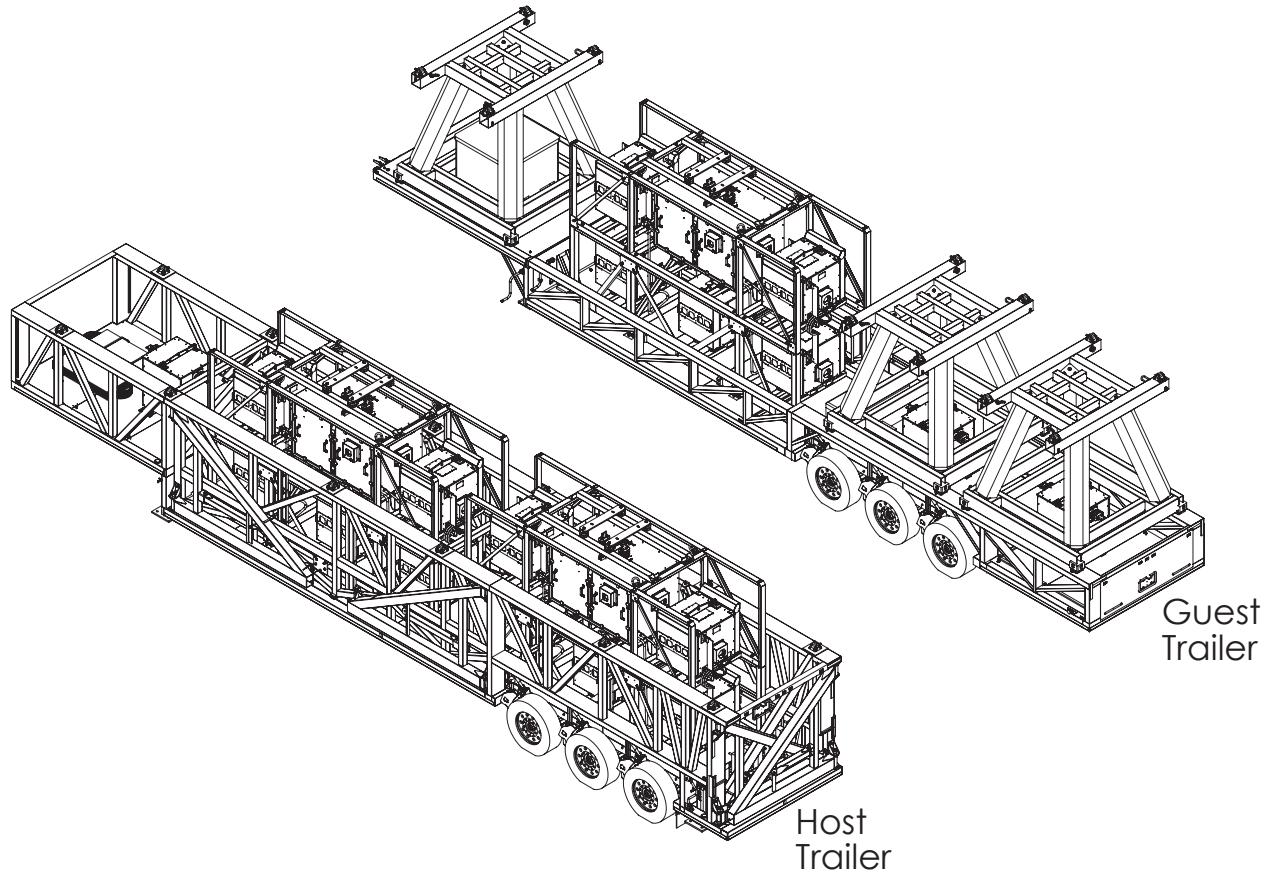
Mobile SmartValve Unit – Transportation Configuration Isometric View
